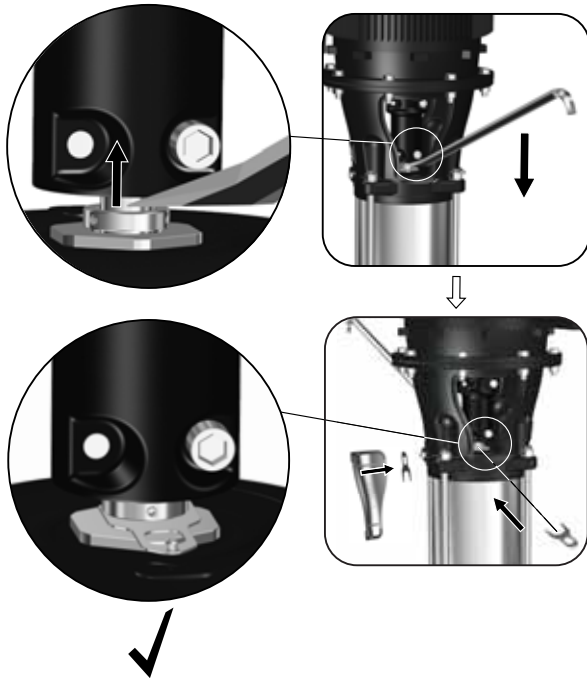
Lifting pump shaft and fitting adjusting fork.
